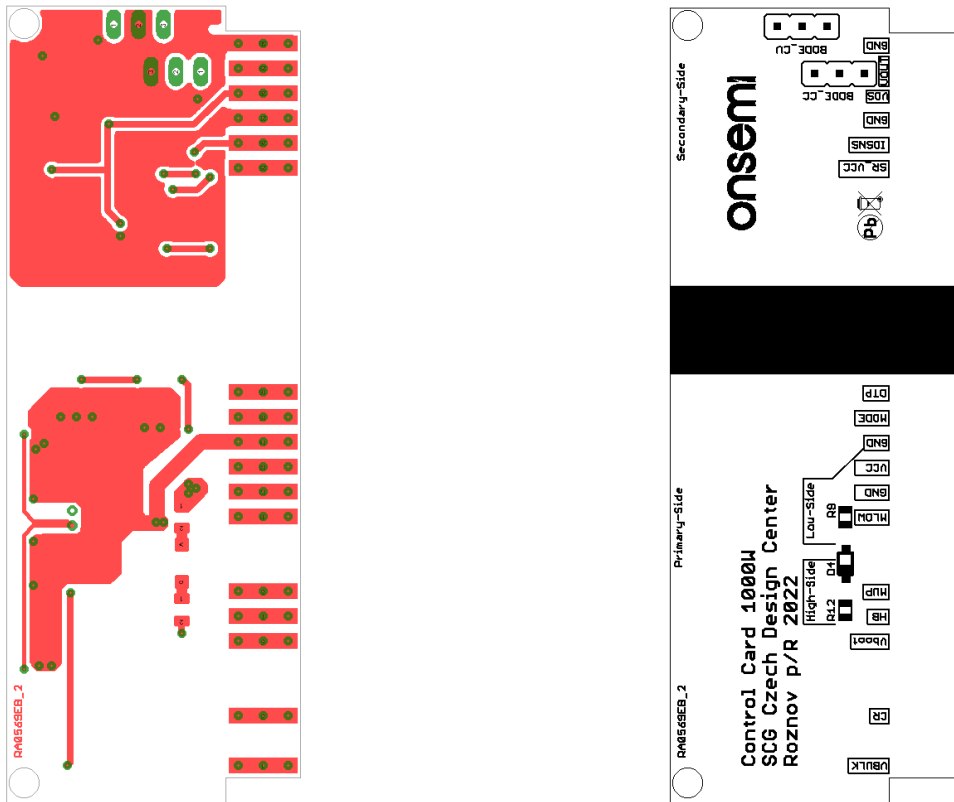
Top Layer PCB Layout and Assembly Plan of LLC CONTROL CARD
